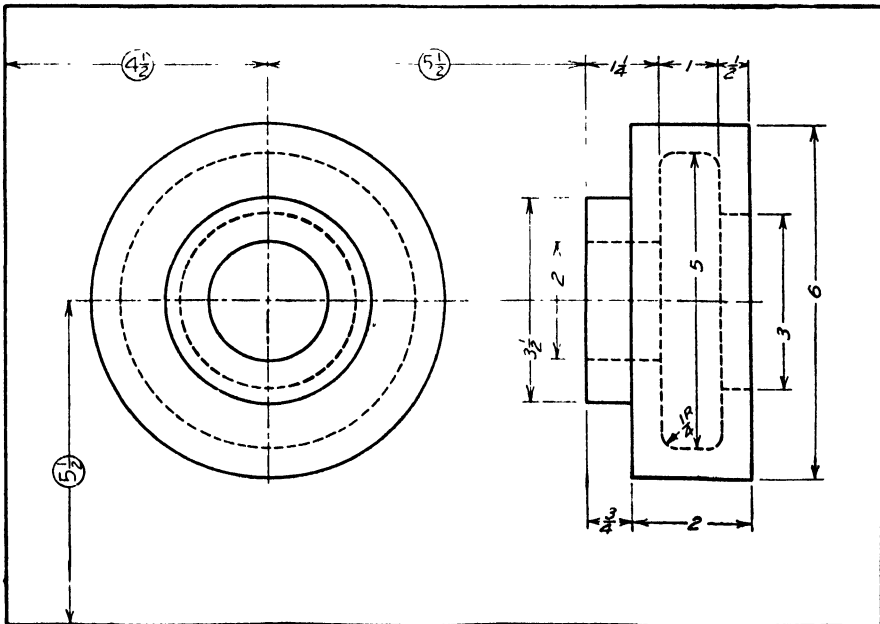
Prob. 142. Make a two-view drawing of the reducing spacer, the right-hand view to be a full section.
